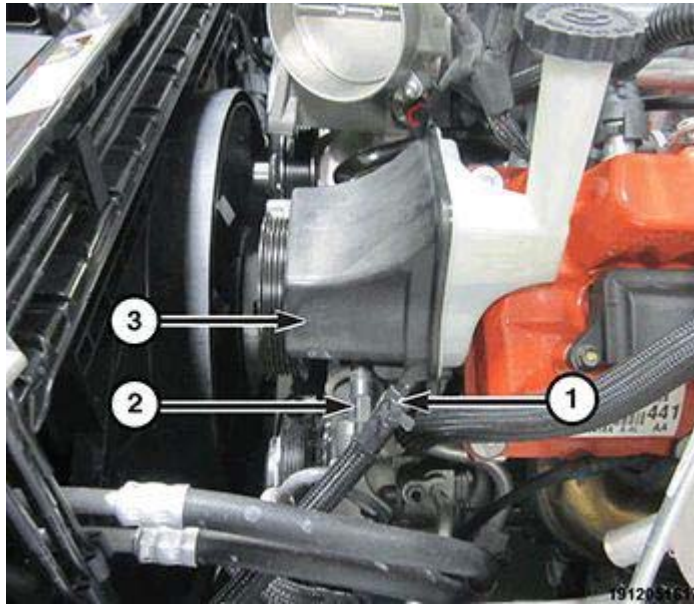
Supply Hose, Pressure Hose & Power Steering Pump
